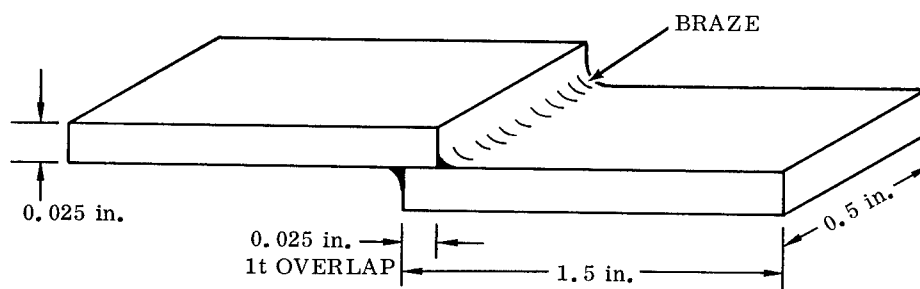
BRAZED SINGLE-LAP SHEAR SPECIMEN
